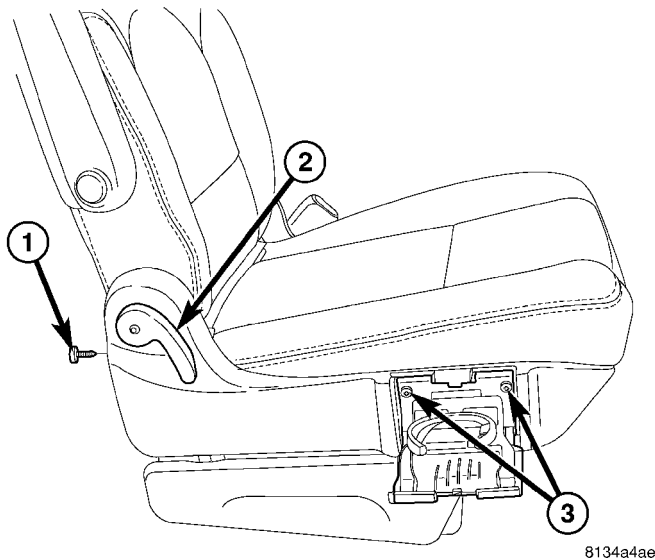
SECOND ROW SEAT UPPER SIDE SHIELD
